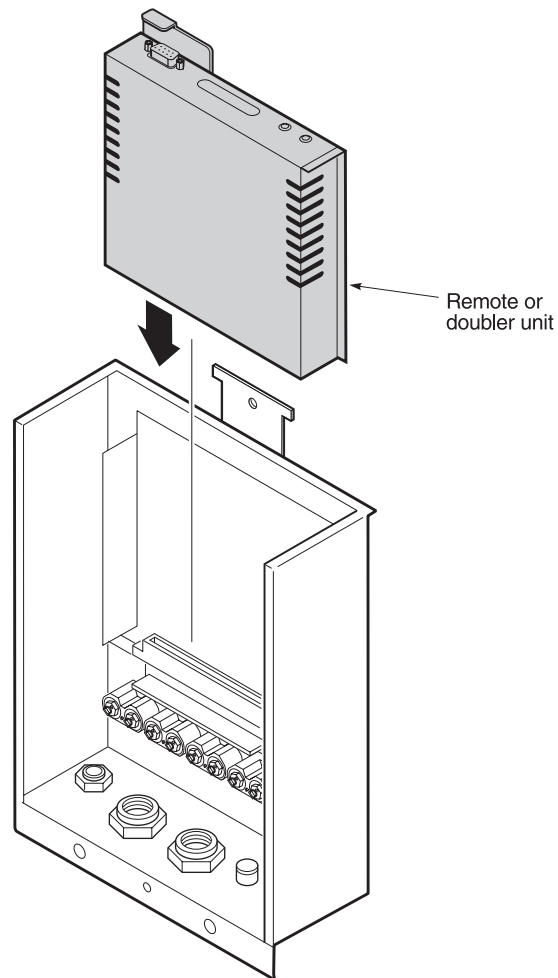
Installing a Remote or Doubler Unit in an HRE-450
